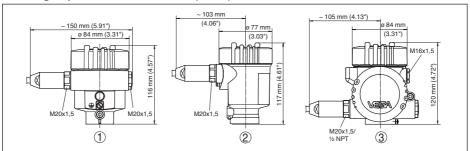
Housing versions in protection IP266/IP268 (12bar) - with integrated display and adjustment module the housing is 92mm/0.352in higher
